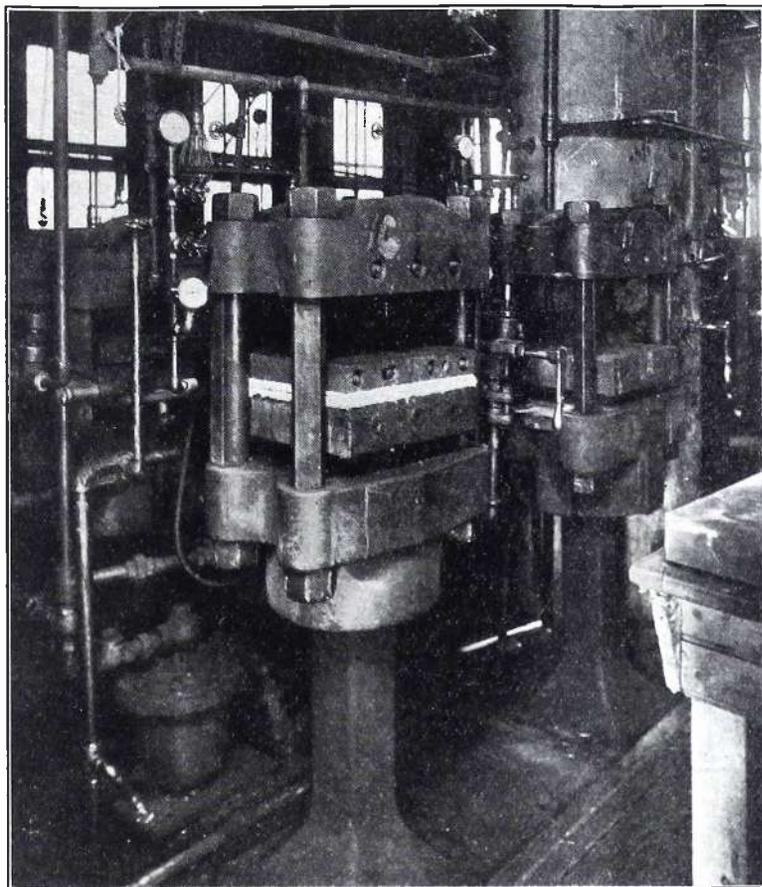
Bakelite molding press equipped with connections to provide heating by gas
